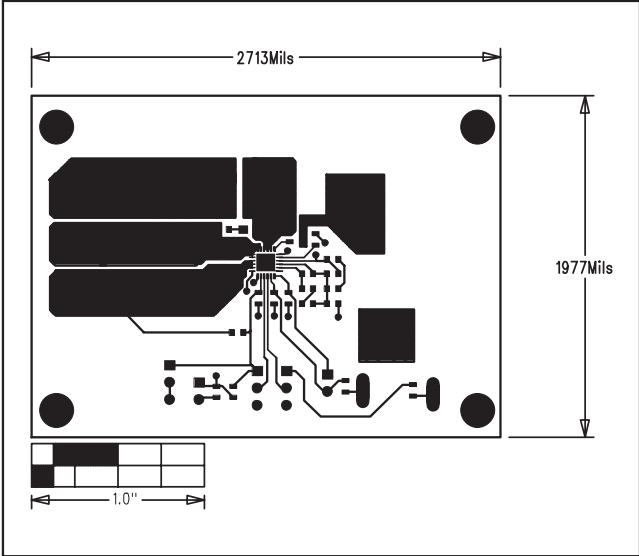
MAX8646 EV Kit PCB Layout—Component Side
